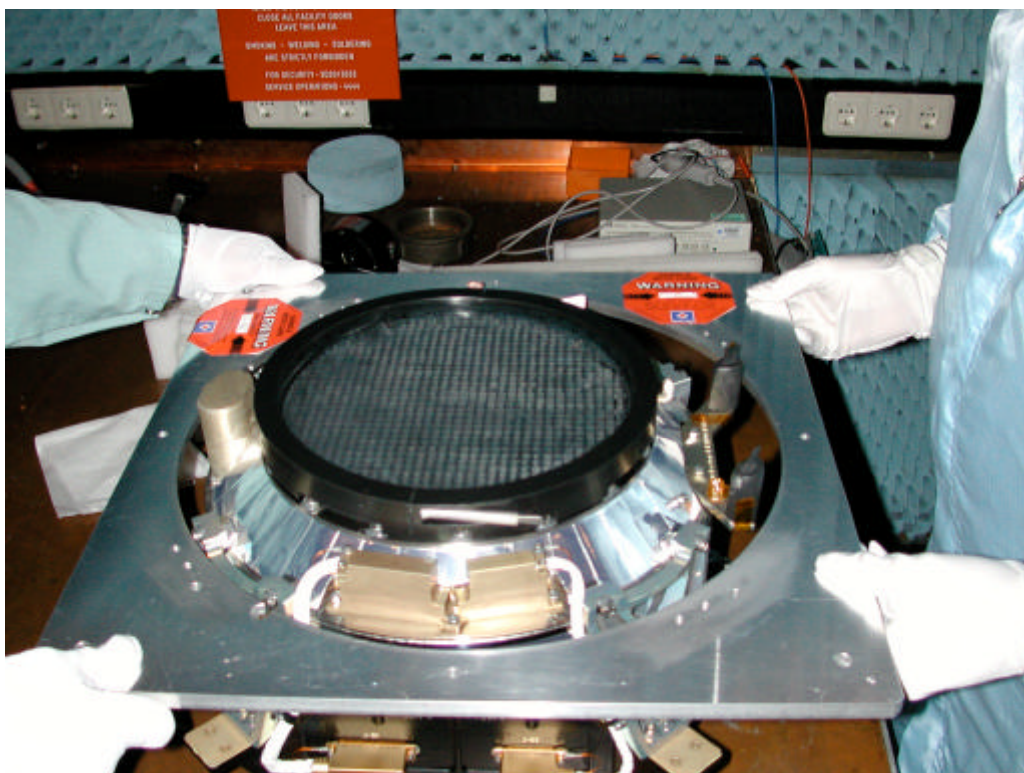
Removal of the support plate. Pay attention to the alignment prisms, here shown protected with black plastic tube on the right side of the Detector.
